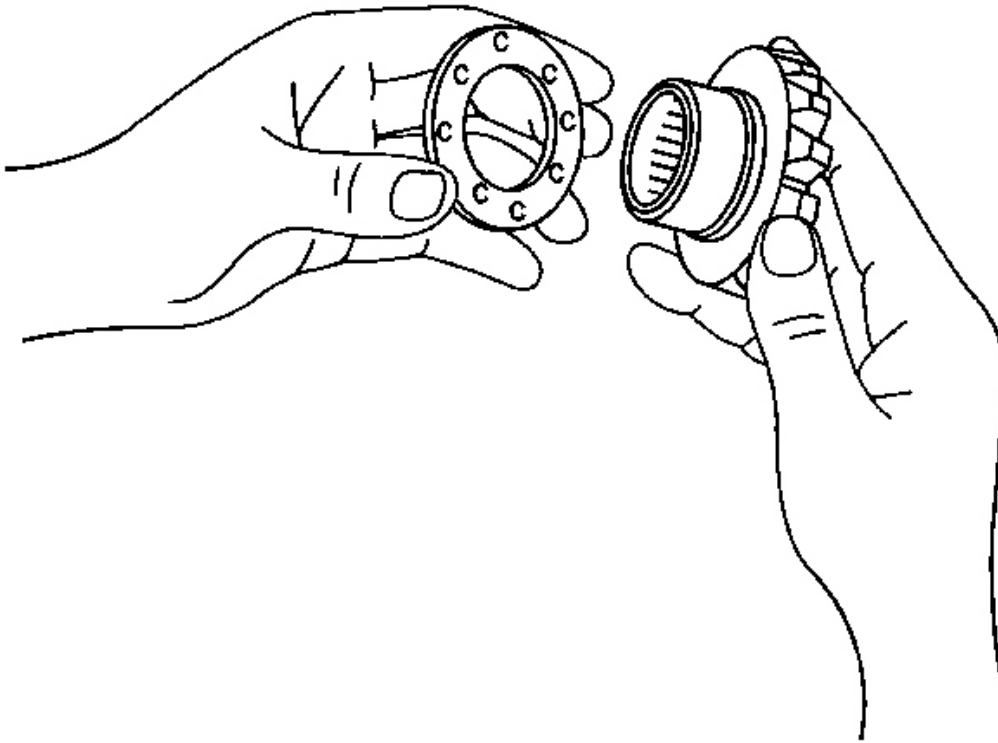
Differential Side Gear Thrust Washers & Differential Side Gears
